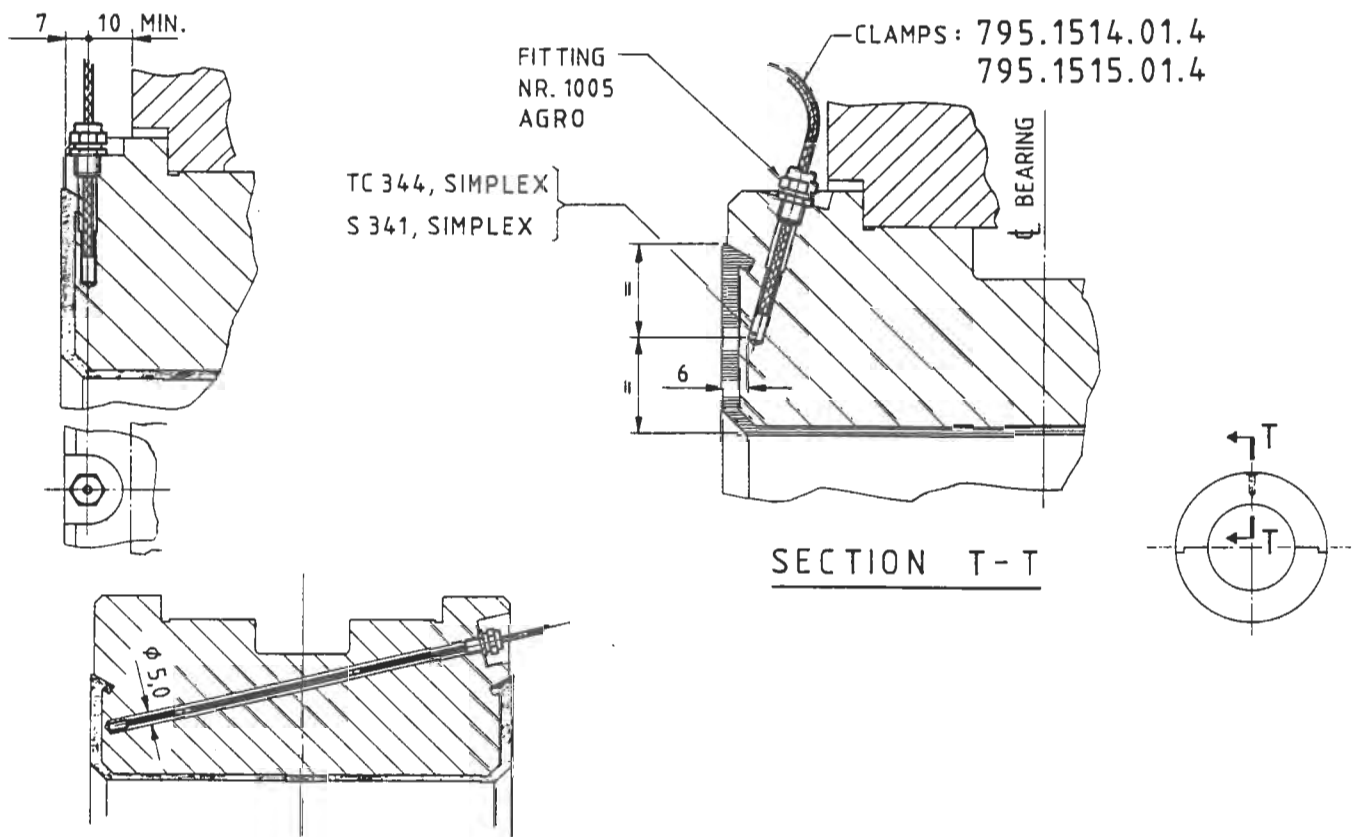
Technical details of embedded type TC and RTD's in taper land axial thrust bearing
